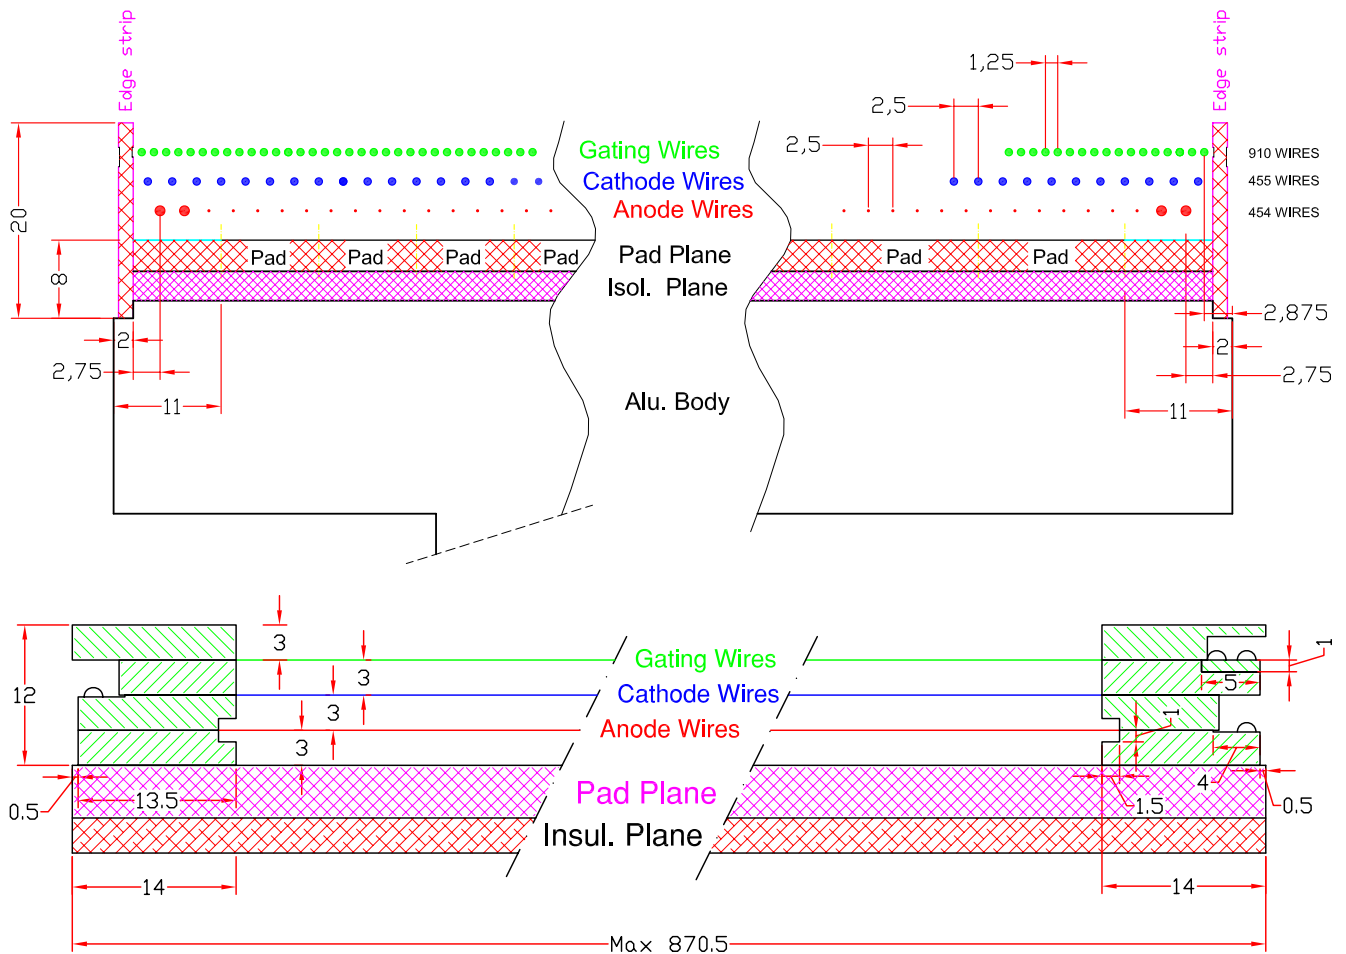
OROC wire geometry viewed in azimuthal (upper drawing) and radial direction [26].
